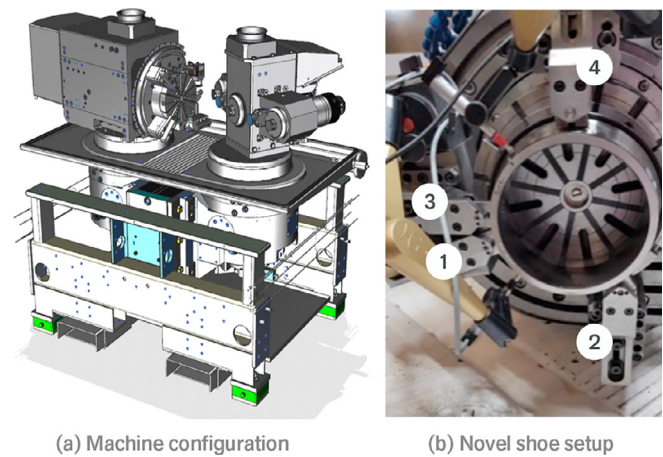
Highly flexible twin-turret grinding machine (TTG Machine, Fives-Cranfield Precision, UK).
